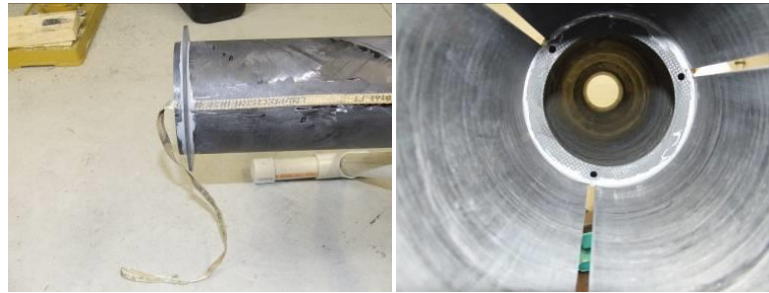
A centering ring was adhered to the outside of the centering tube and another to the inside of the airframe tube.
